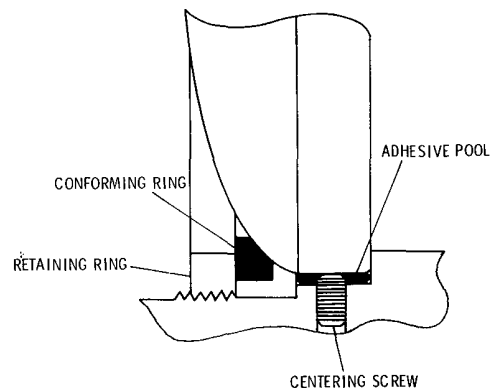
MOUNTING OF LARGE ELEMENTS
